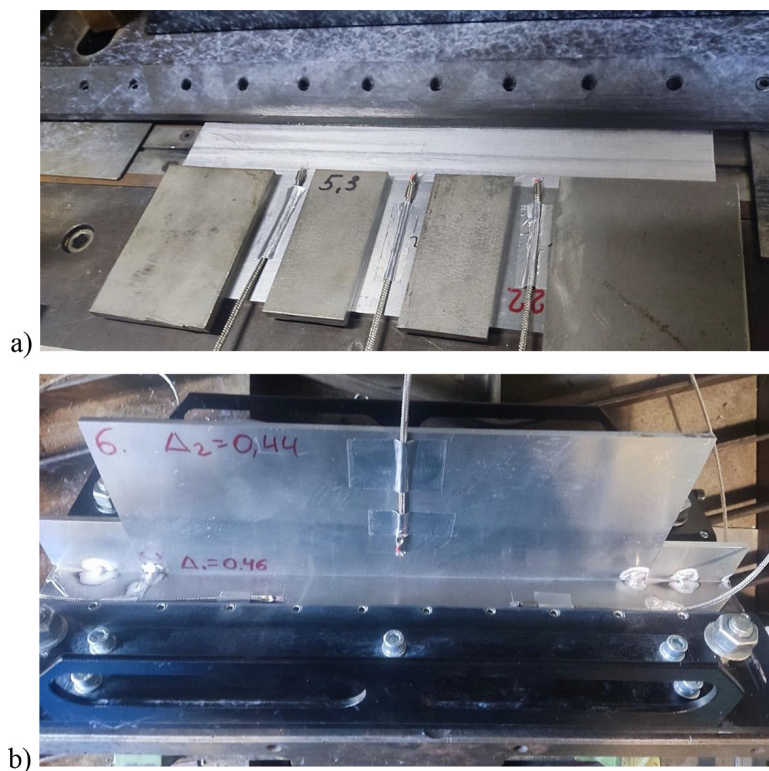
Assembly of specimens of 1561 alloy for MIG-welding with thermocouple mounting
